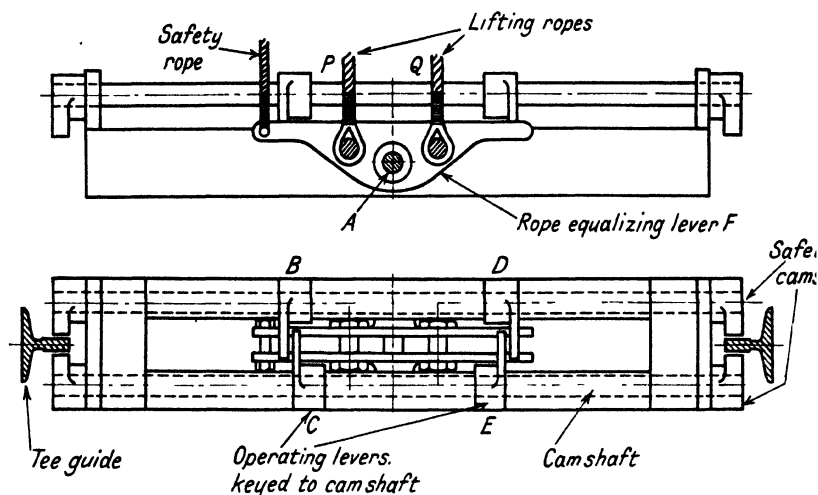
INSTANTANEOUS CAM SAFETY GEAR
